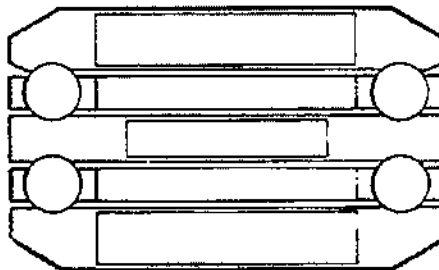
ALIGNING, DOUBLE-ACTING, AND GROOVED-RACE THRUST BALL BEARING.
